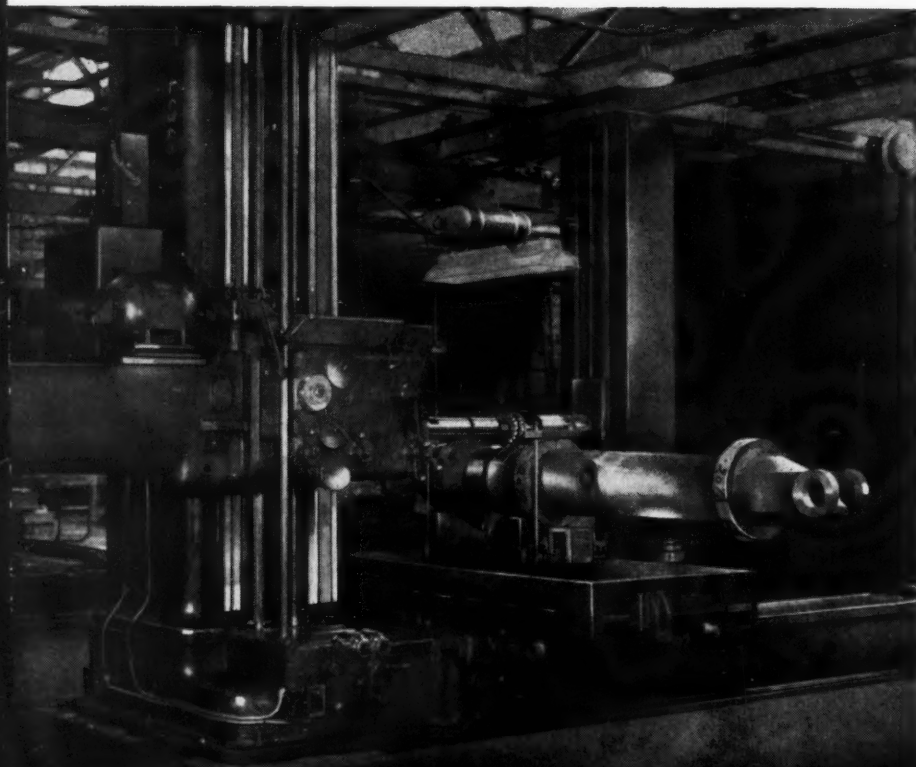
A gang milling set-up on a large horizontal boring mill is employed to machine accessory attachment lugs from solid stock on main landing-gear columns
